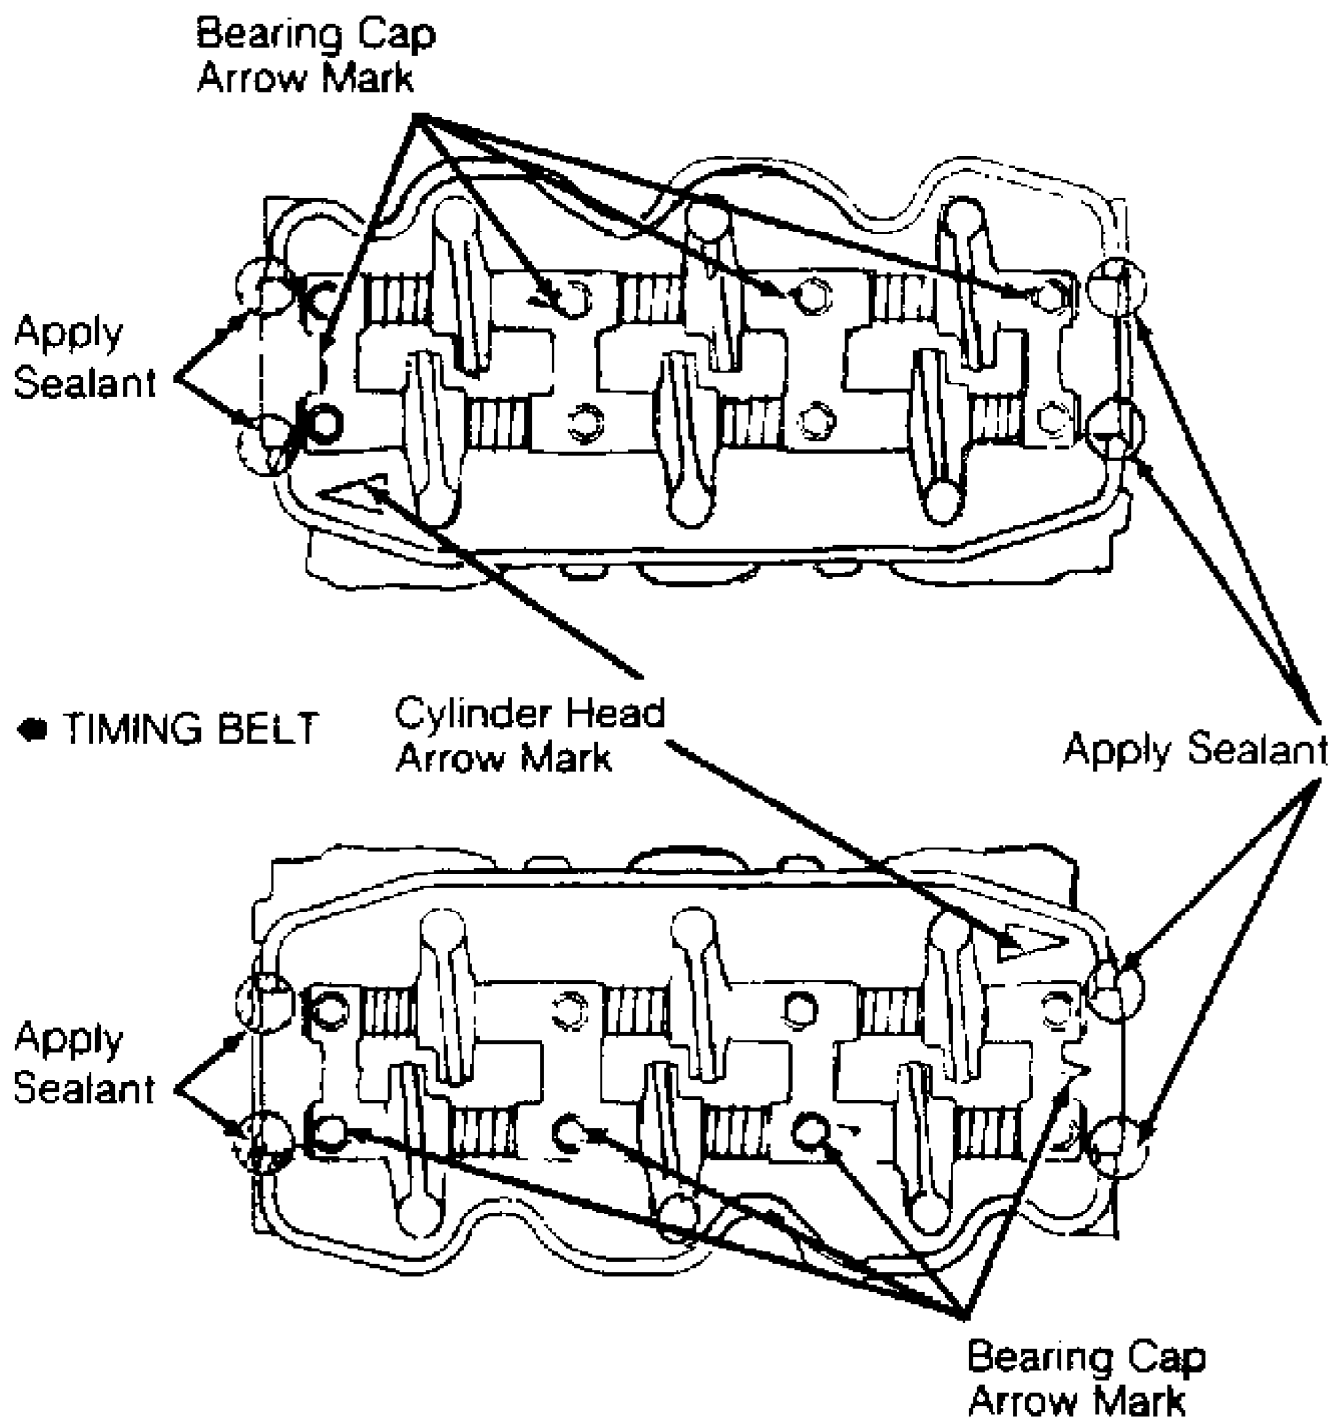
Identifying Bearing Cap & Sealant Locations (SOHC)
